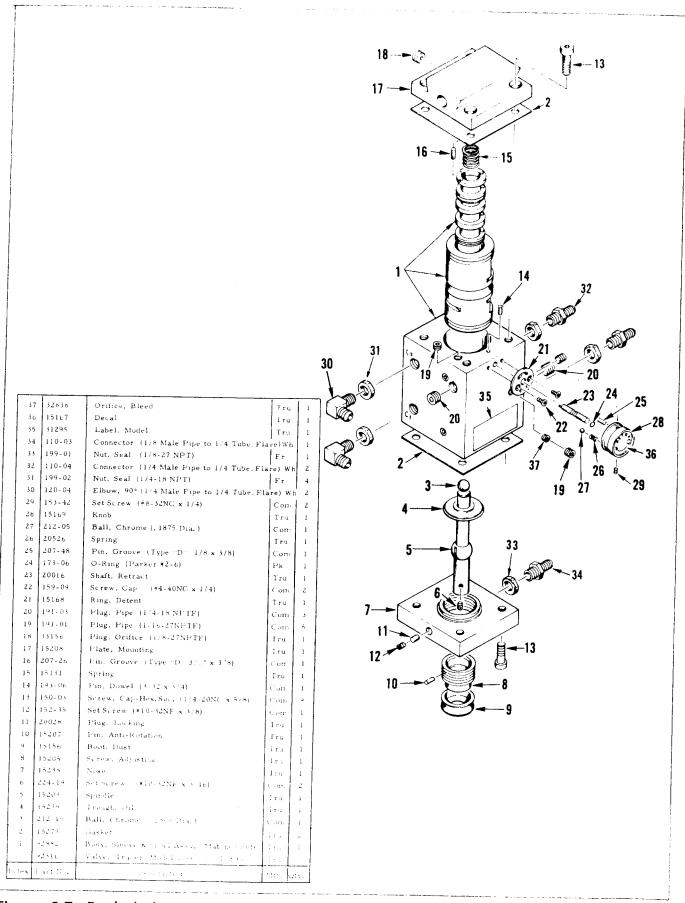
Exploded View and Replaceable Parts List for Model 1066-05 Tracer Valve. (Used with Mark IIA and III Series)
